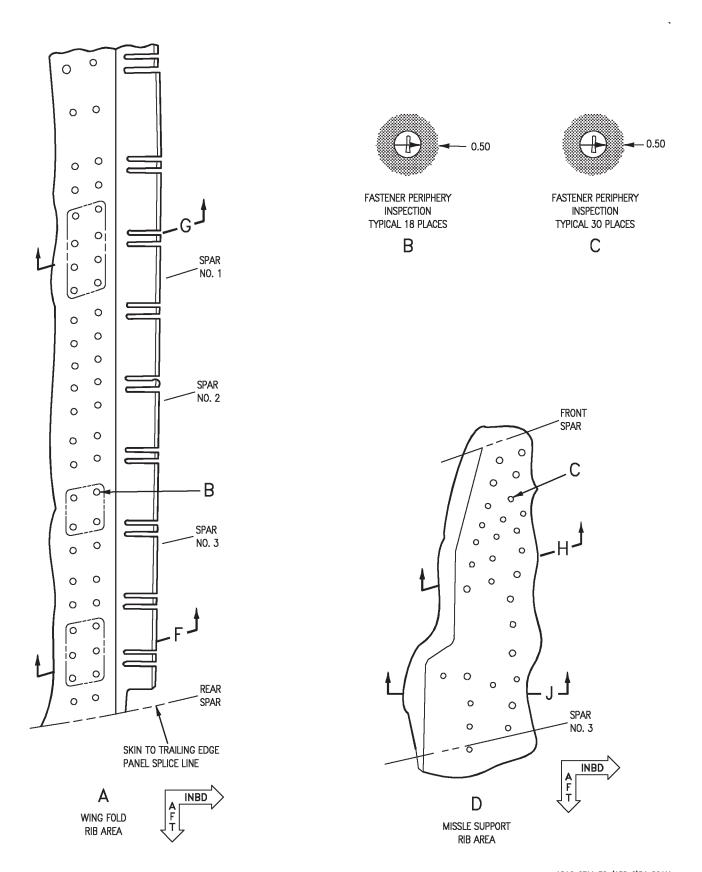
Outer Wing Upper Surface Inspection Areas (Sheet 2)
